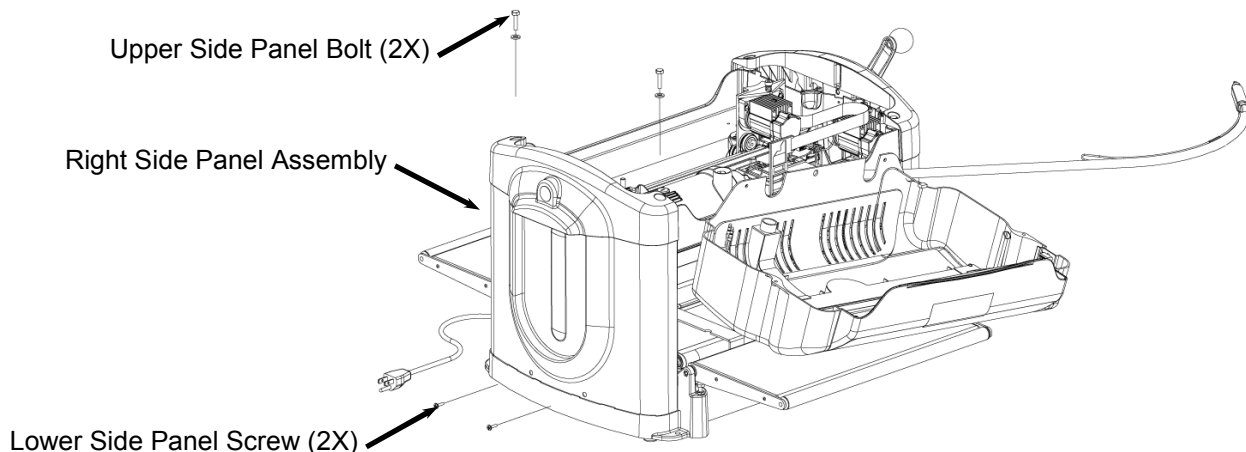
EXPLODED VIEW OF THE RIGHT SIDE PANEL FASTENERS
